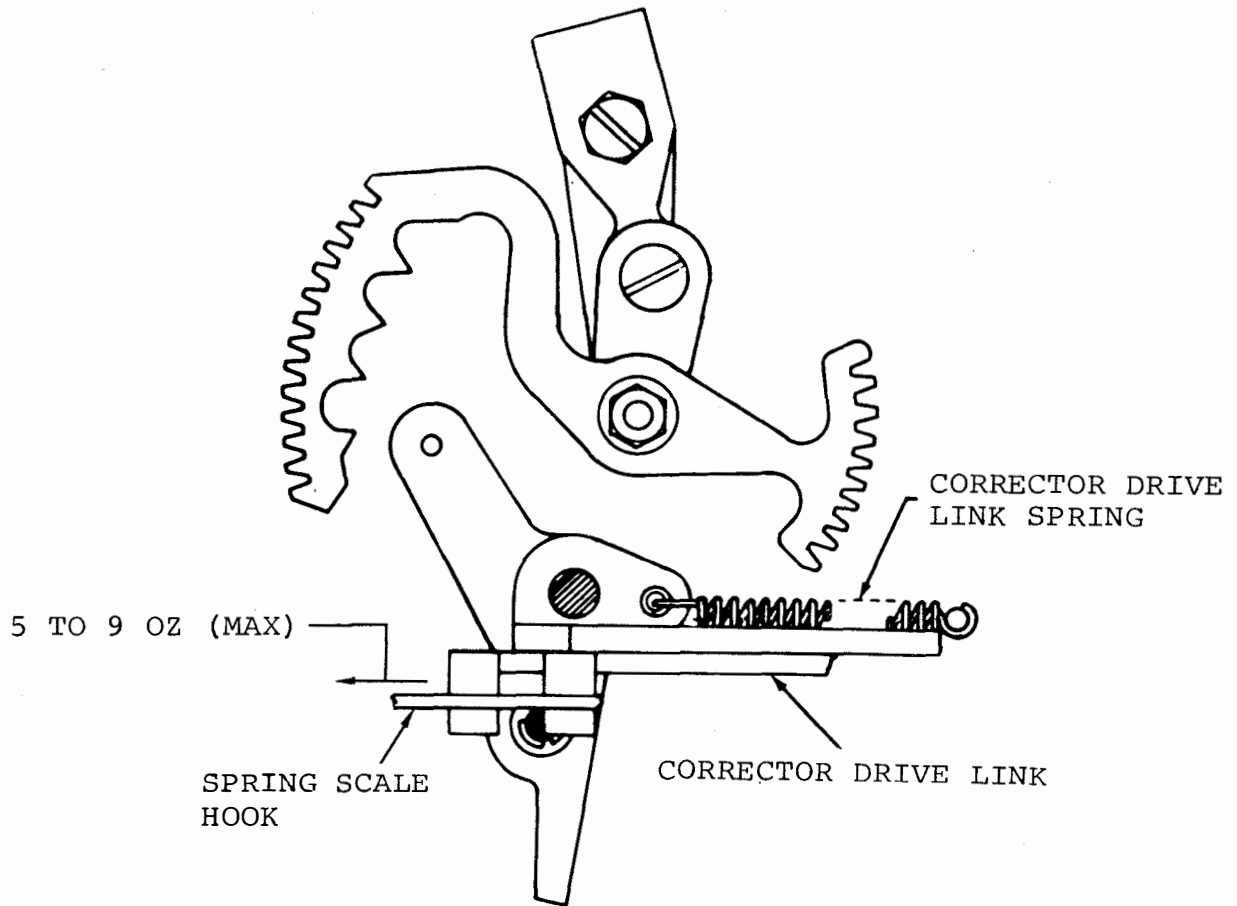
Corrector Drive Link Spring (Non-yielding), Top View
